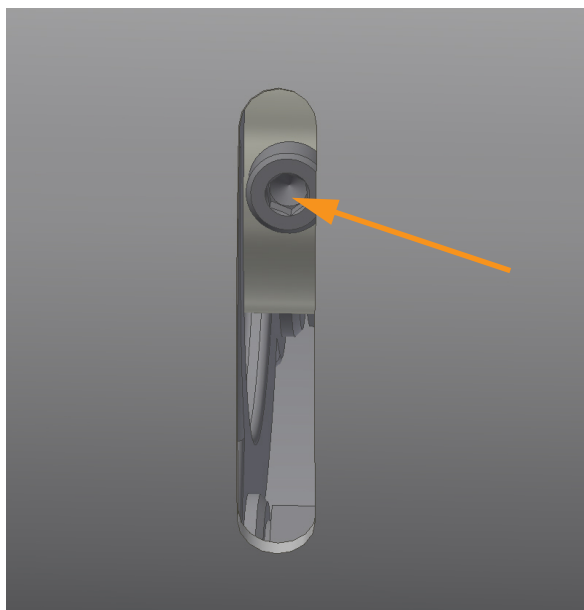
Rotor fuse, drive side: Detail - cheese head screw with hexagon socket
